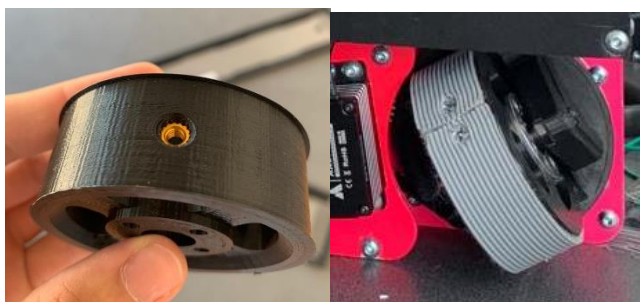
Threaded heat inserts mounted in the 3D printed wheel rim.
